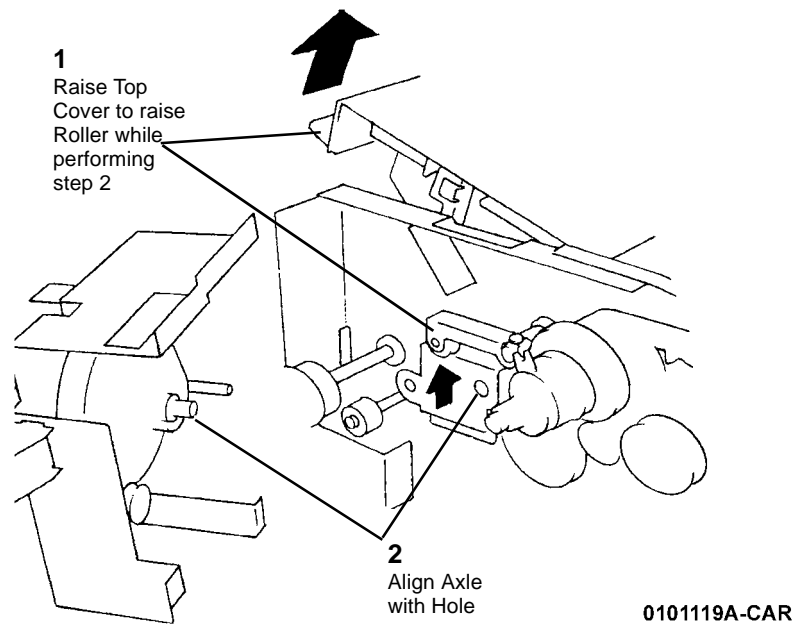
Inserting Axle of Cam Bracket Assembly into Hole
